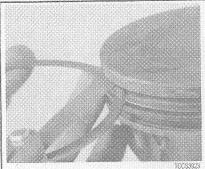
Checking the piston ring-to-ring groove side clearance using the ring and a feeler gauge
